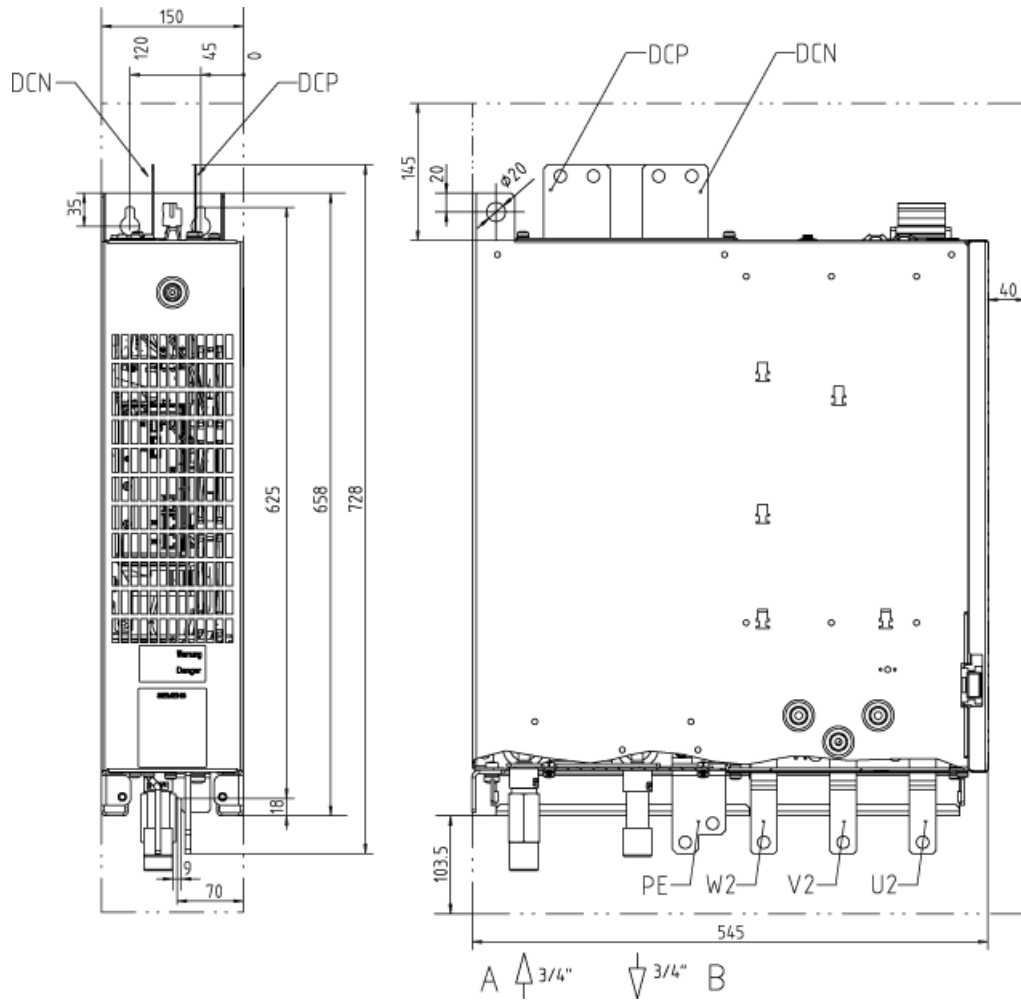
Dimension drawing Motor Module, frame size FXL. Front view, side view
